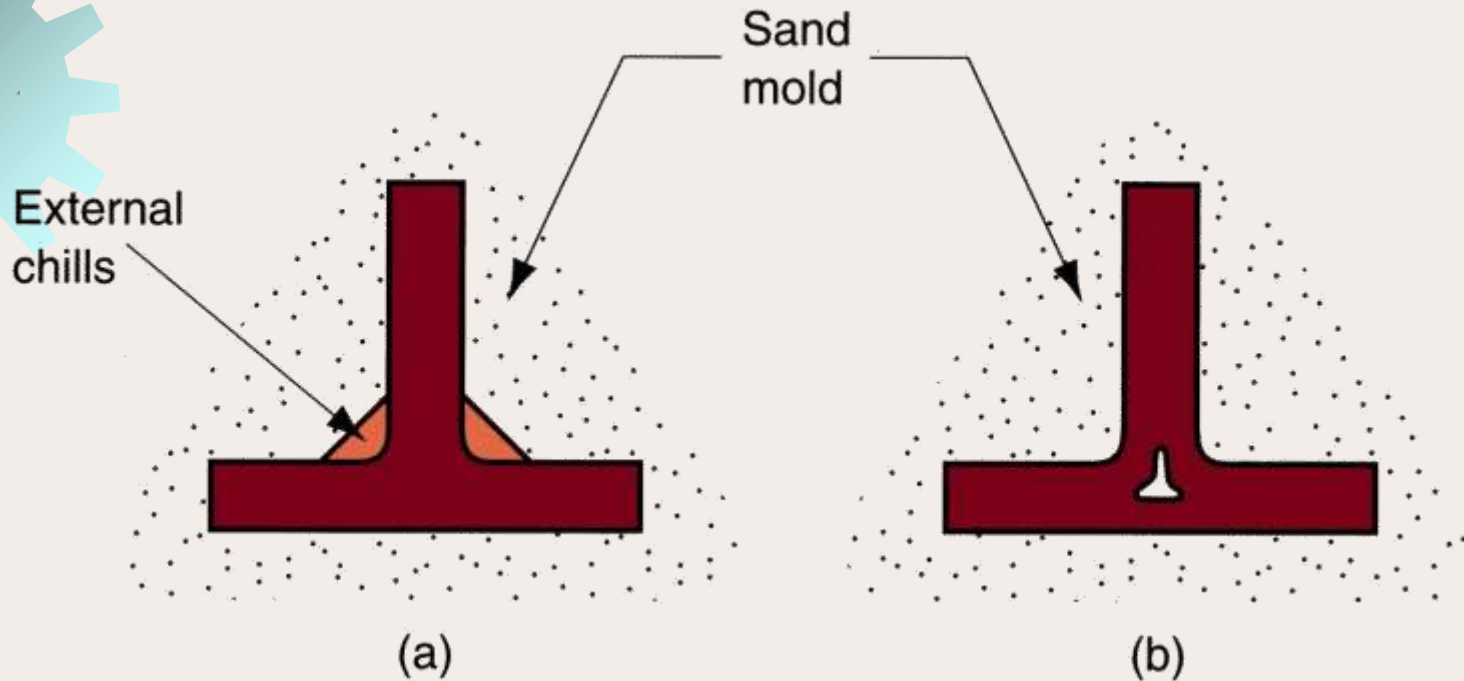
(a) External chill to encourage rapid freezing of the molten metal in a thin section of the casting; and (b) the likely result if the external chill were not used.
